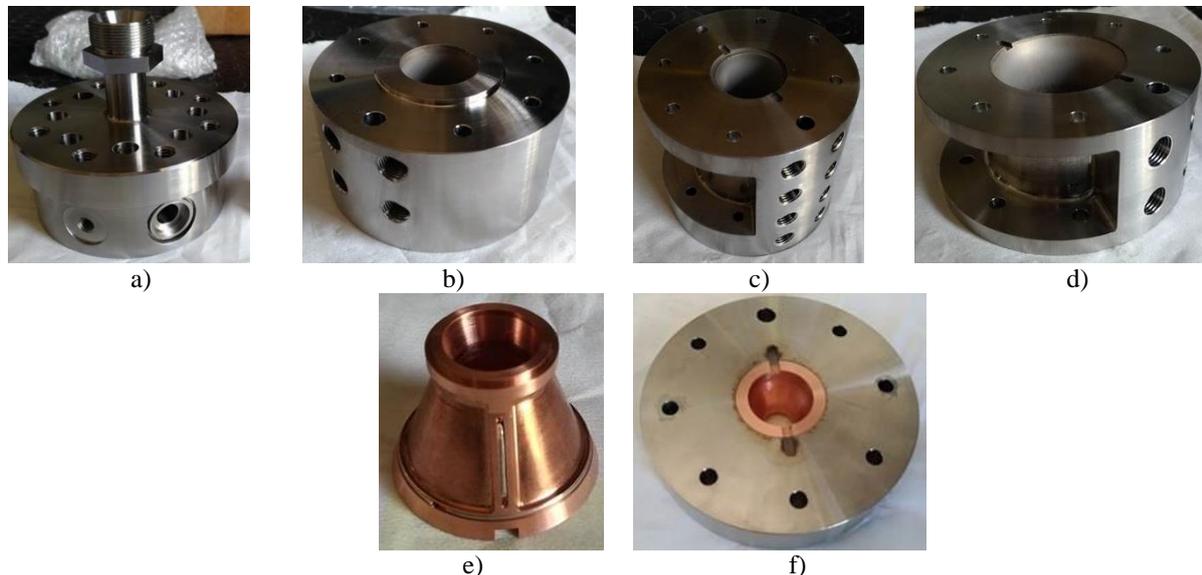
SSBB-CC modules in the manufacturing phase: a) injector plate; b) close-out of cylindrical part module 1; c) close-out of cylindrical part module 2; d) close-out of nozzle module; e) copper liner of throat module; f) assembly of throat module.
